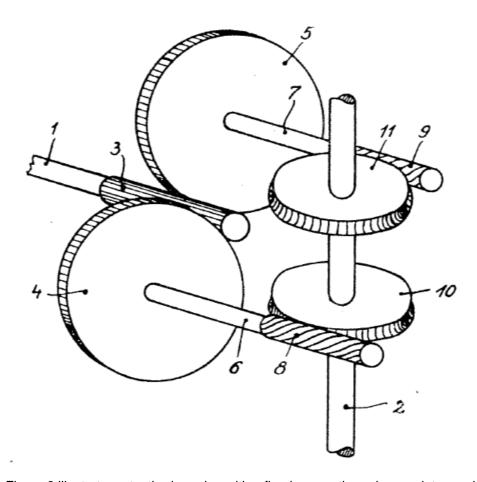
illustrates a toothed gearing with a fixed gear ratio and seven intermeshing gears. Torque from the driving shaft, i.e. worm shaft (1), is divided between intermediate worm shafts (7) and (6) and summed at driven shaft (2).
